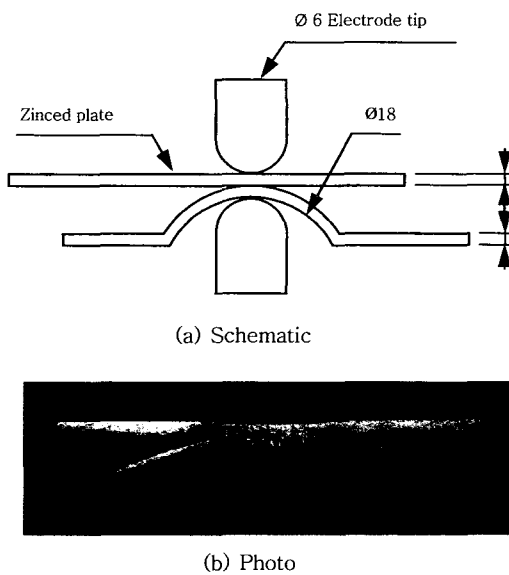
Geometry of specially designed weld specimen for spatter analysis
